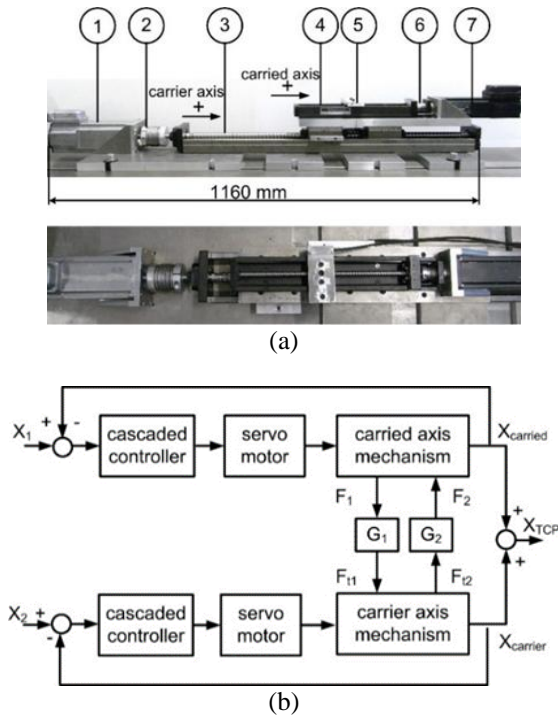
(a) the redundant structure assembly: 1, 7 two synchronous servomotors; 3,4 ball screws; 5 tool center point; 2, 6 flexible couplings, (b) a simplified block diagram of the kinematic redundant feed drive system [10].
